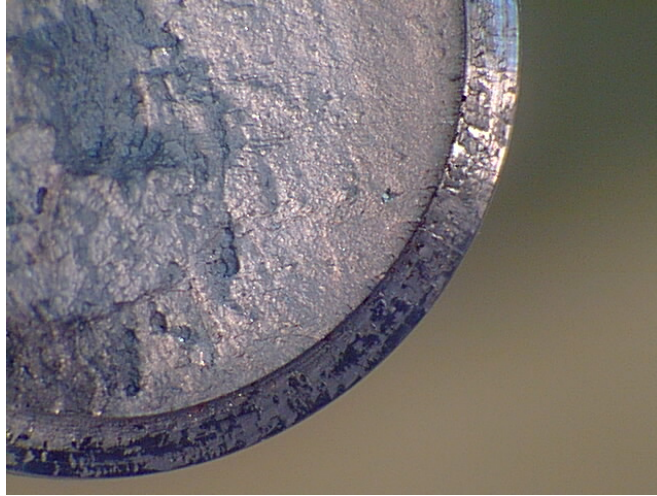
Thread chatter in 4330 uncorroded tangentially blended fillet specimen - Degradation of material surface due to tool impact causing chatter.
